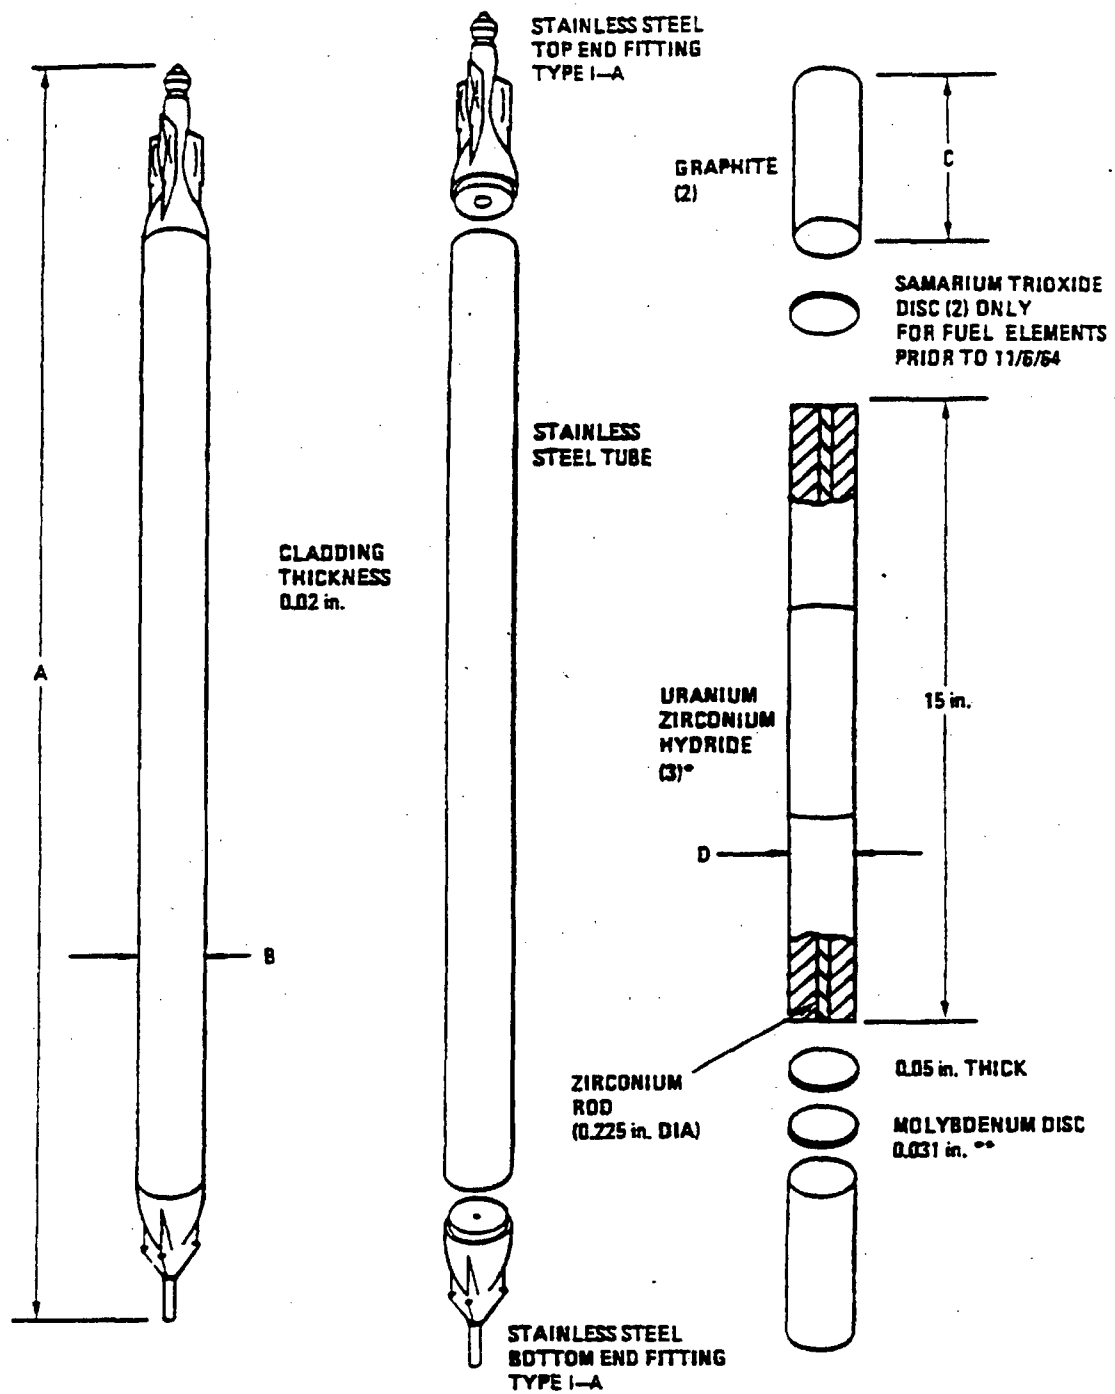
Stainless Steel Clad Instrumented Fuel Element
